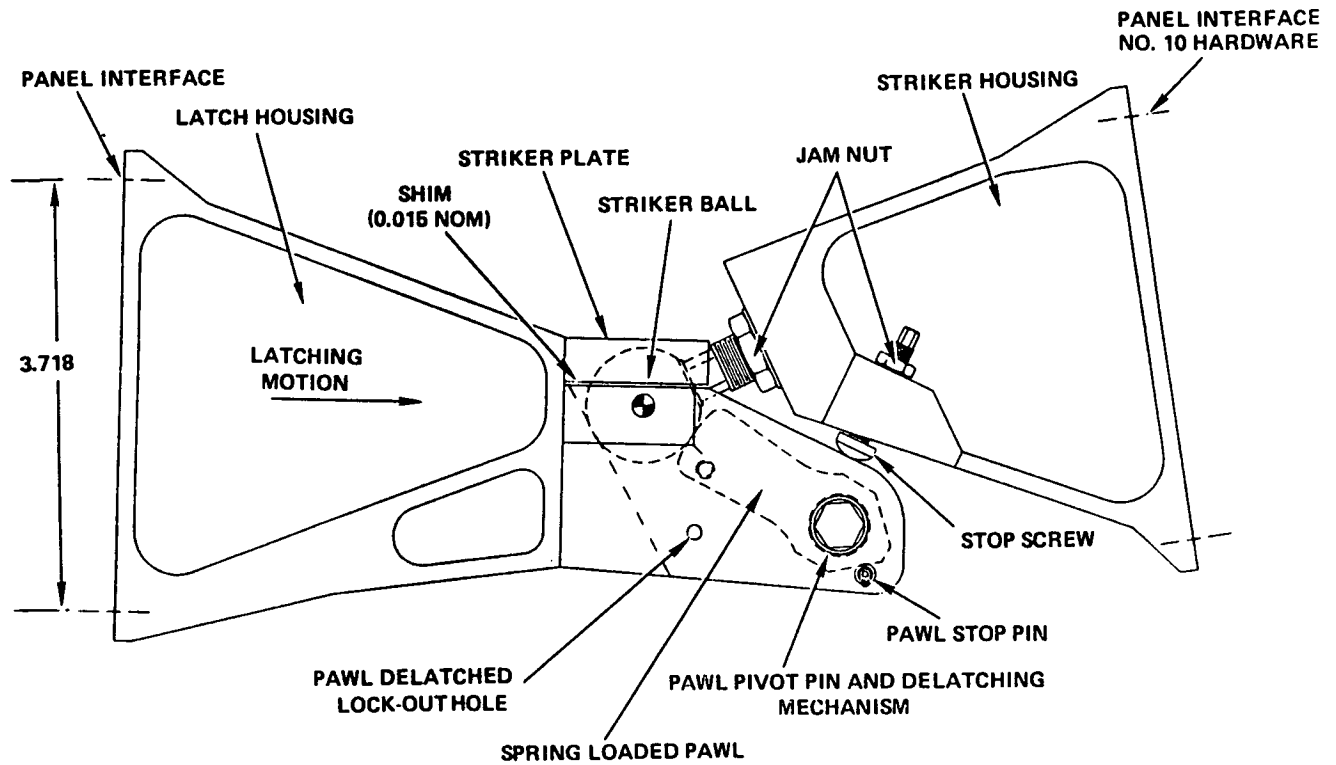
Typical Latch/Striker Assembly For The Harris Designed Zero Translation, Regenerative Latch System
